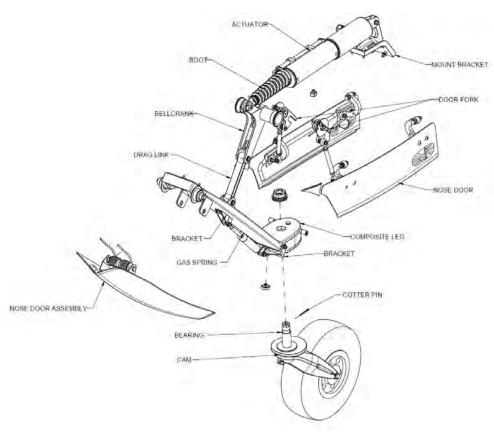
NOSE LANDING GEAR ASSEMBLY DETAIL.
